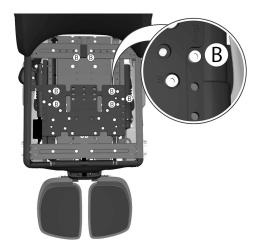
The position of the rear section of the seat frame (backrest position) is fixed by seven screws, here marked with the letter B.
